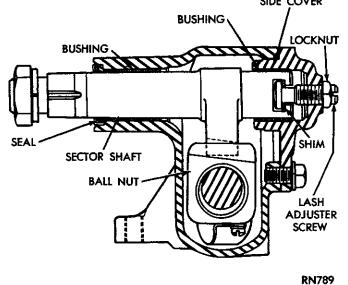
Ball Nut Rack/Sector Shaft Gear Teeth Mesh (Lash) Adjustment
